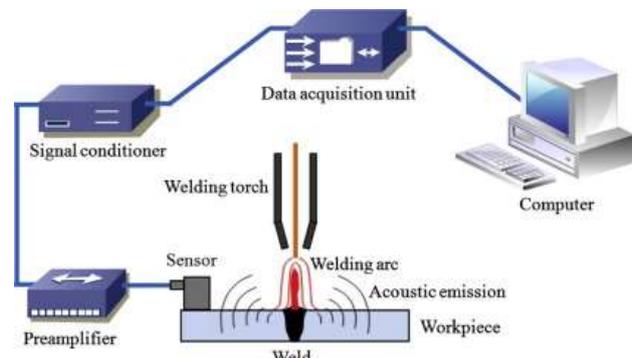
Schematic presentation of AEM for TIG welding
